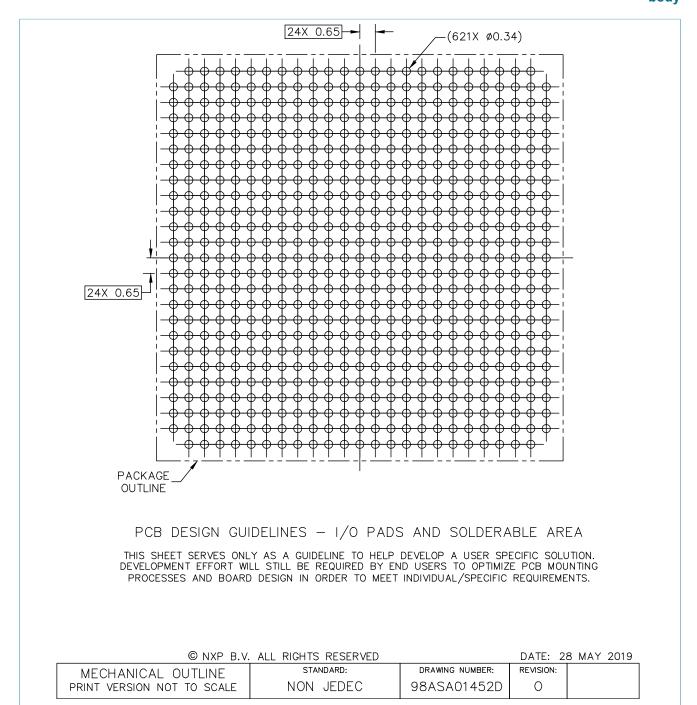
Reflow soldering footprint part2 of FBGA621 (SOT1840-6)
